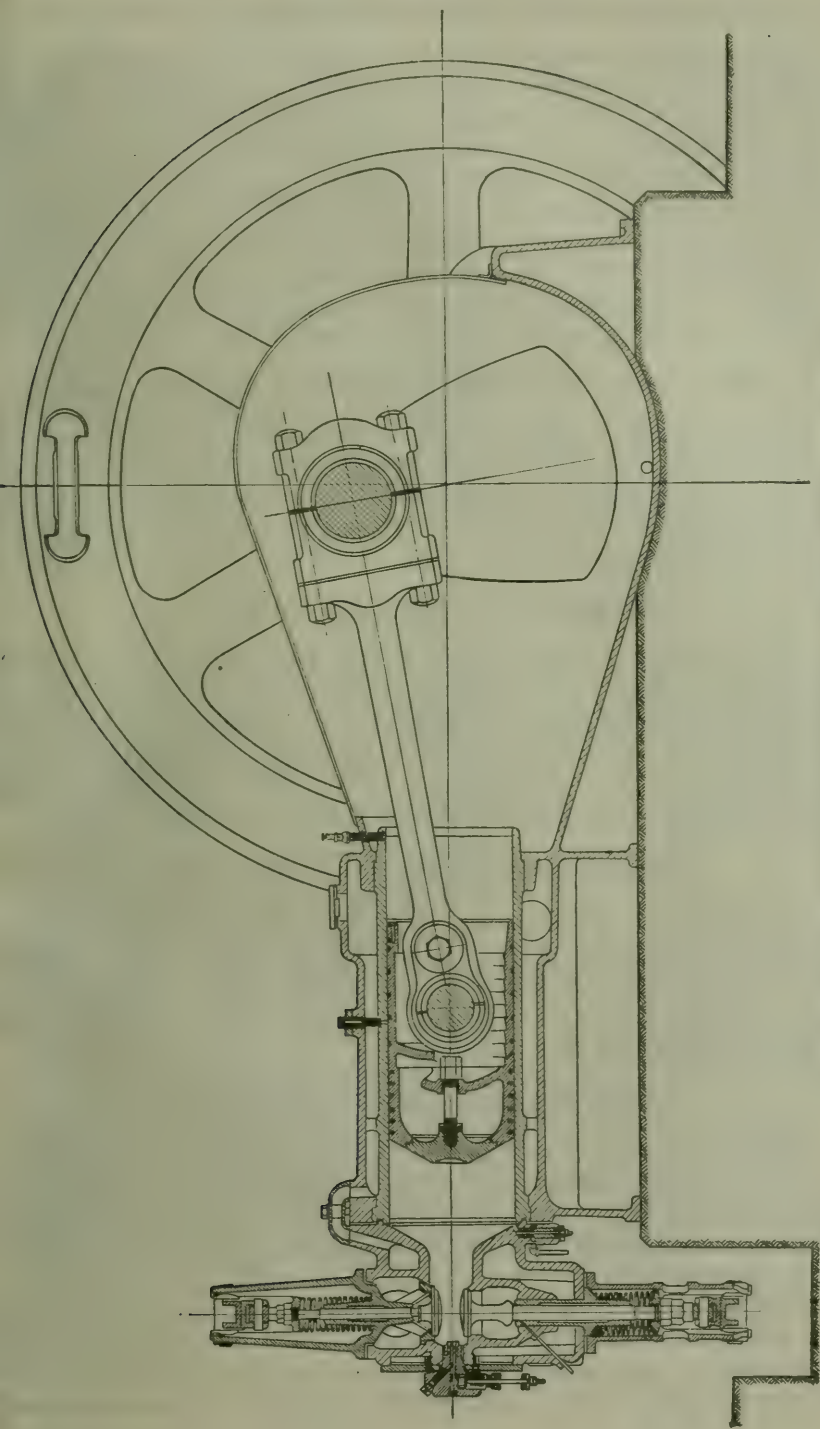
Longitudinal section of Diesel engine built by Allis-Chalmers Manufacturing Co.
